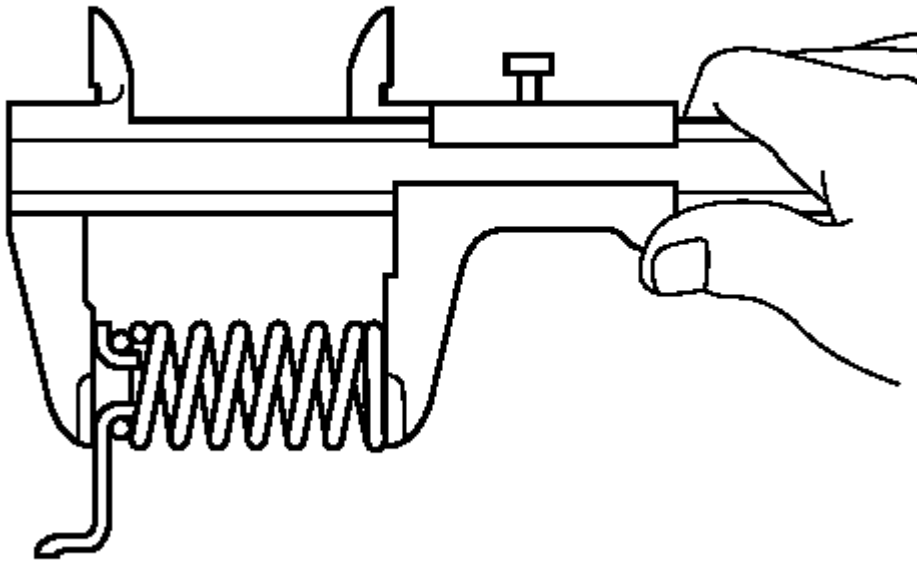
Measuring Free Length Of 1st And Reverse Brake Piston Return Spring
